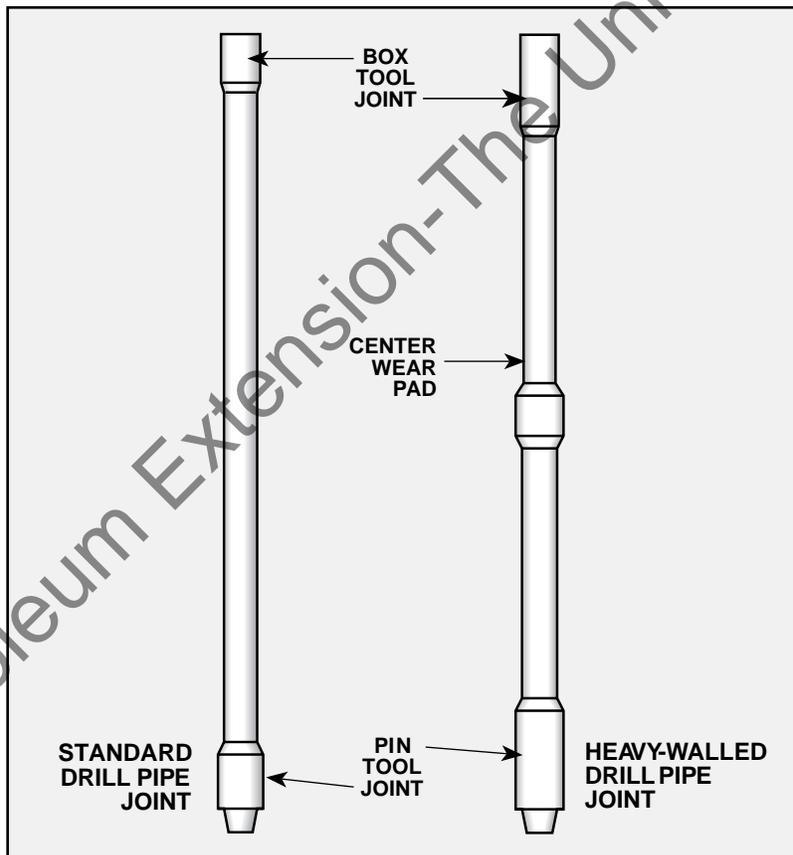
Standard drill pipe joint and heavy-walled drill pipe joint with center wear pad
